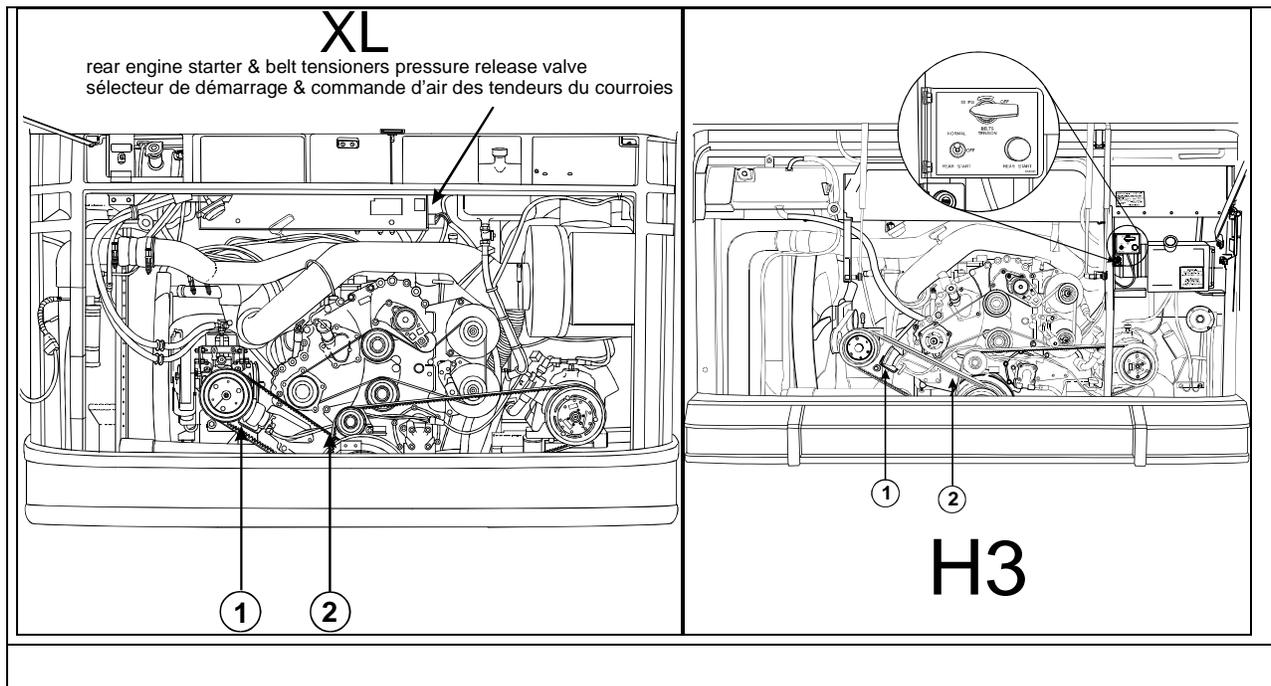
FAN DRIVE ASSEMBLY COMPONENTS : (1) STOP; (2) DRIVING BELTS
